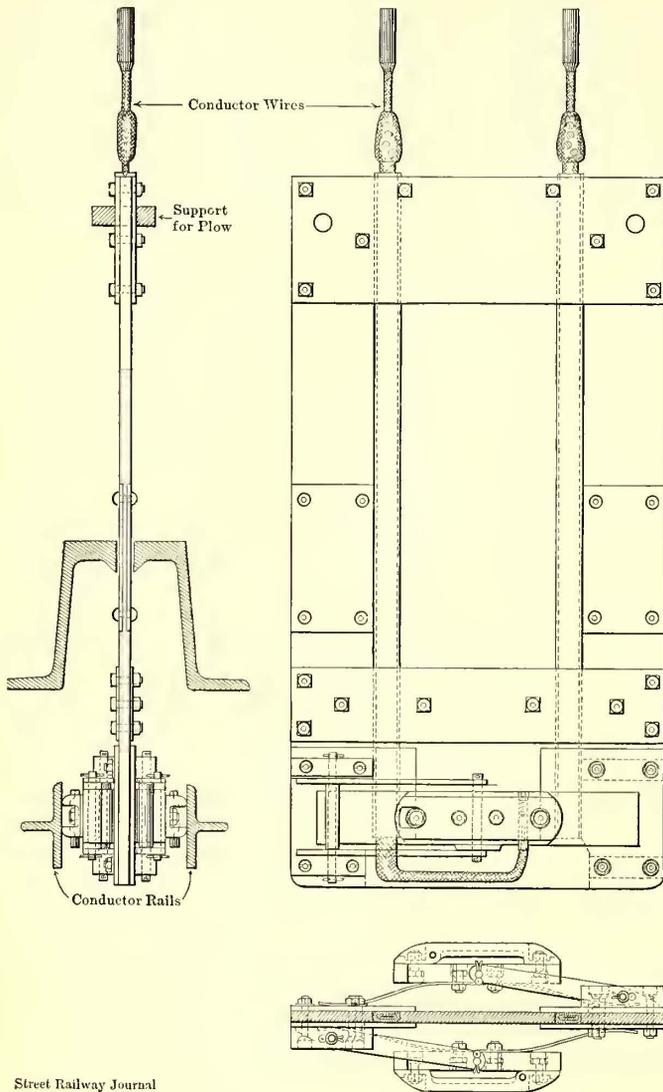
METHOD OF ASSEMBLING INSULATORS.
